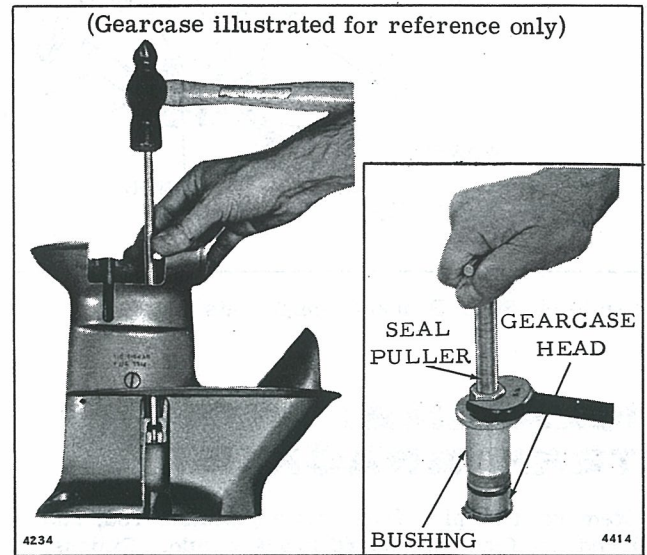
Driving Out Shift Rod Seal and Bushing
